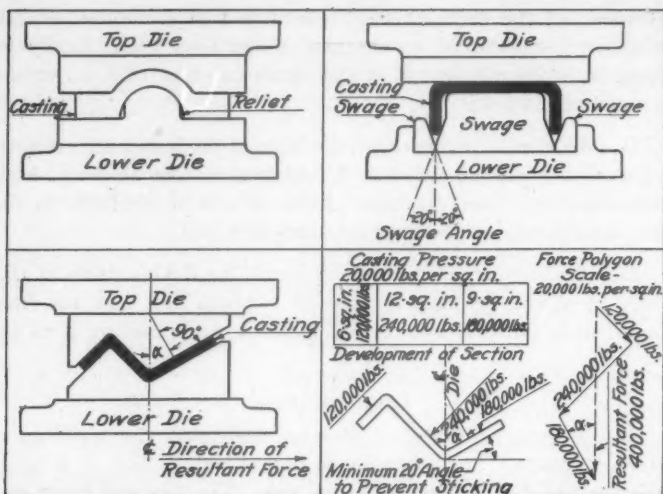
UPPER LEFT—FORMING DIE SHOWING UNIFORM DISTRIBUTION OF PRESSURE ON CASTING. FIG. 7—UPPER RIGHT—FORMING DIE WHICH APPLIES A RESULTING HORIZONTAL PRESSURE BY THE APPLICATION OF A SWEDGE. FIG. 8—LOWER LEFT—FORMING DIE USED TO STRAIGHTEN CASTINGS HAVING ANGULAR SURFACES, SUCH AS A "Z" SECTION. FIG. 9—LOWER RIGHT—CONSTRUCTION OF A FORCE POLYGON USED TO DETERMINE PRESSURES AND THE RESULTING FORCE FOR DIE CONSTRUCTION SHOWN IN FIG. 8.
